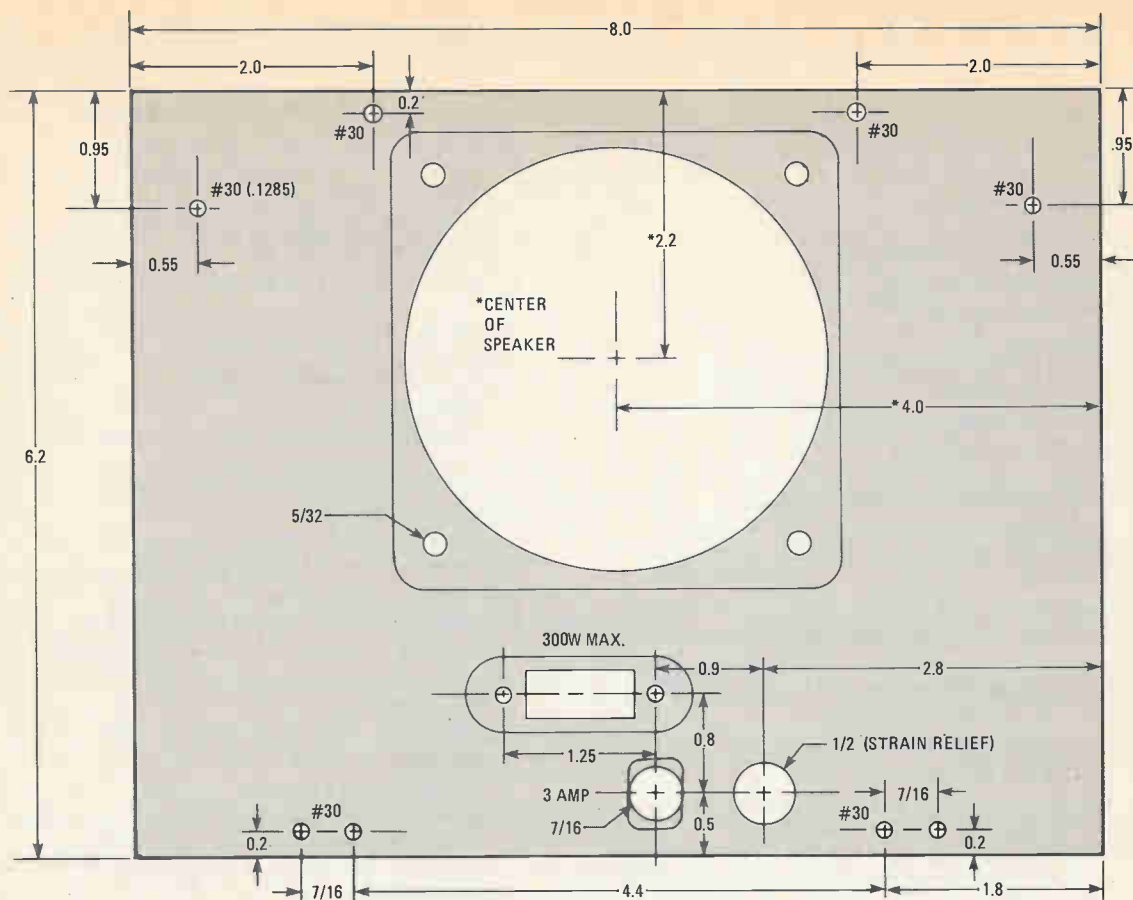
BACK PANEL detailed diagram showing location of parts mounted on the panel. Drill holes to match speaker selected for project. All dimensions are in inches and drill size.
